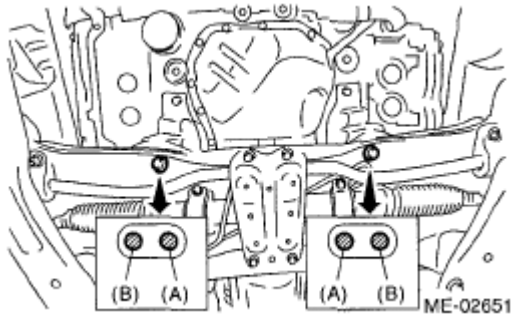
Locating Front Cushion Rubber Mounting Bolts
